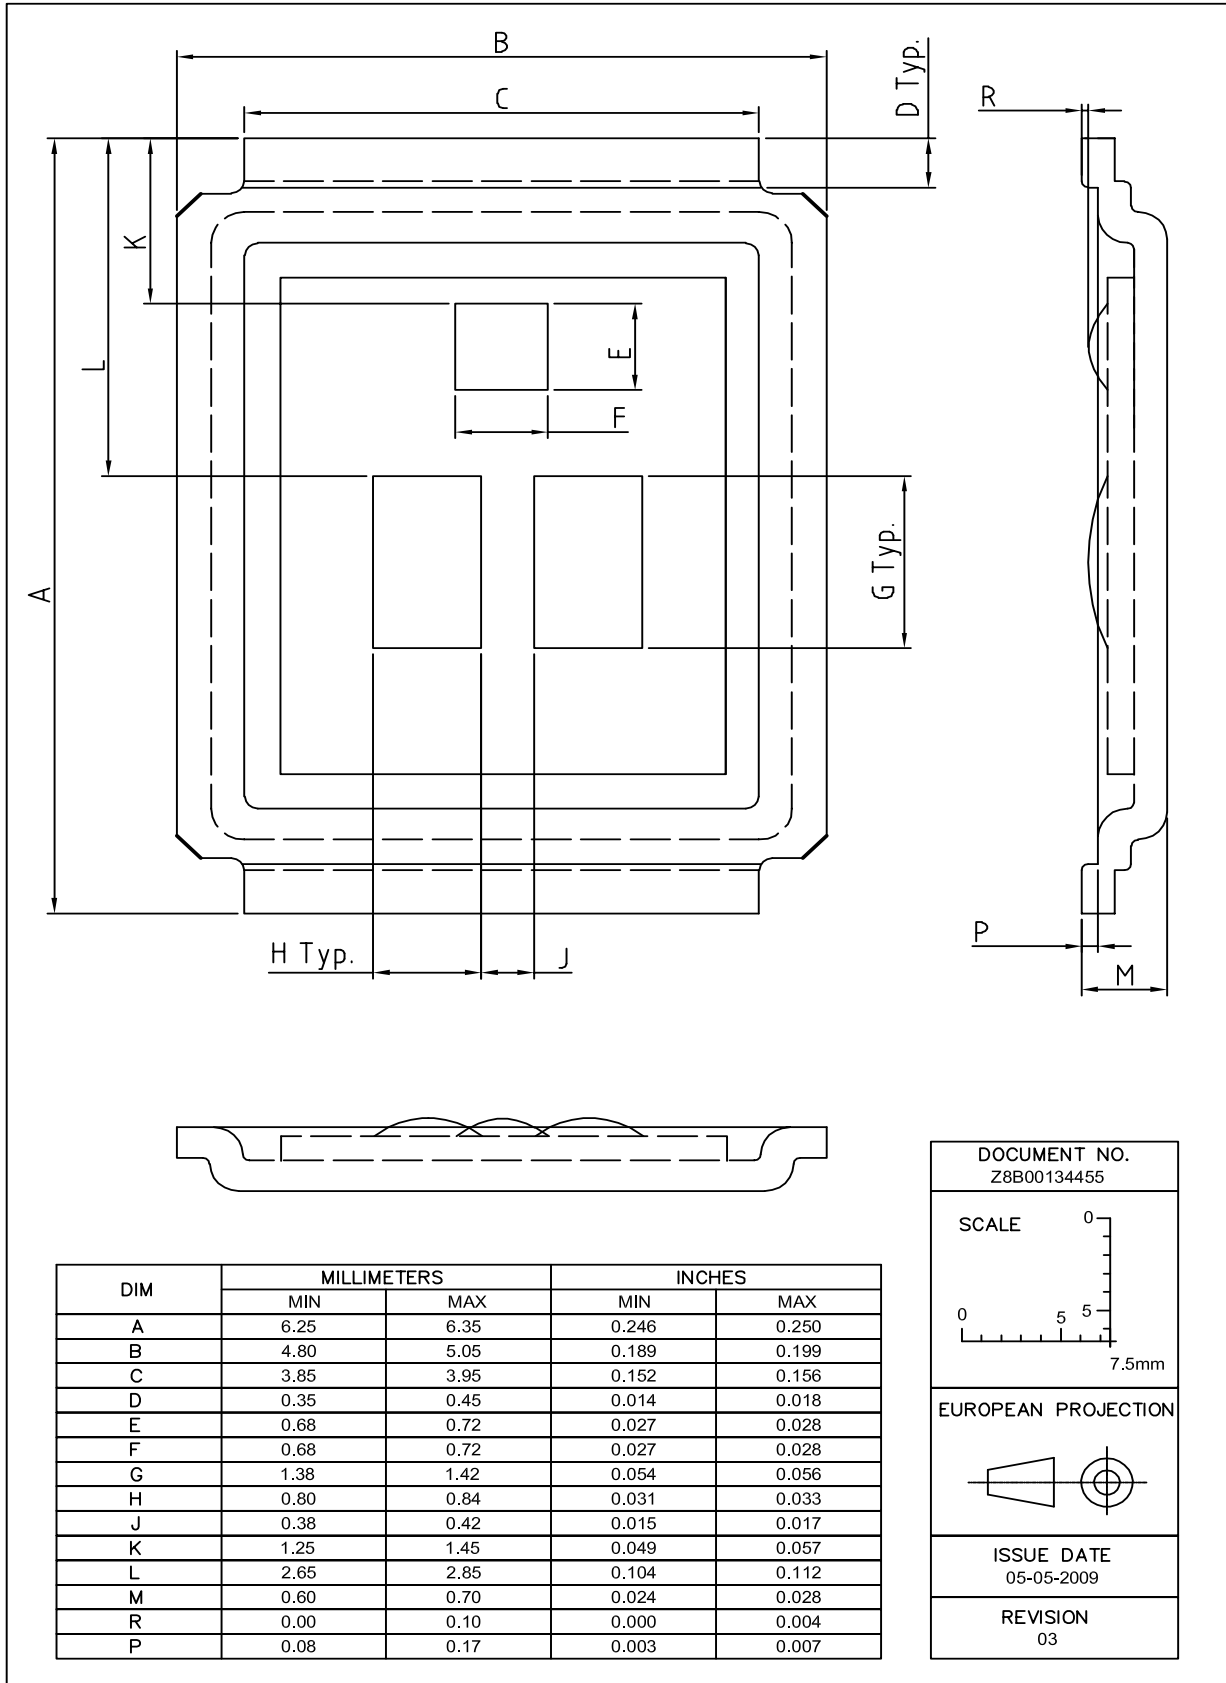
Outline MG-WDSO-2, dimensions in mm/inches
